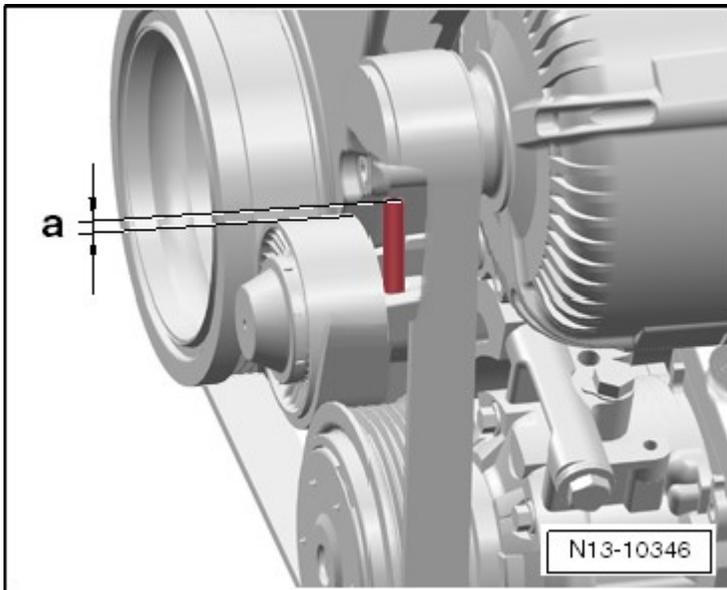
Identifying Dimension -a-: End Of Tensioning Roller Bolt Over Running Surface Of Tensioning Roller
